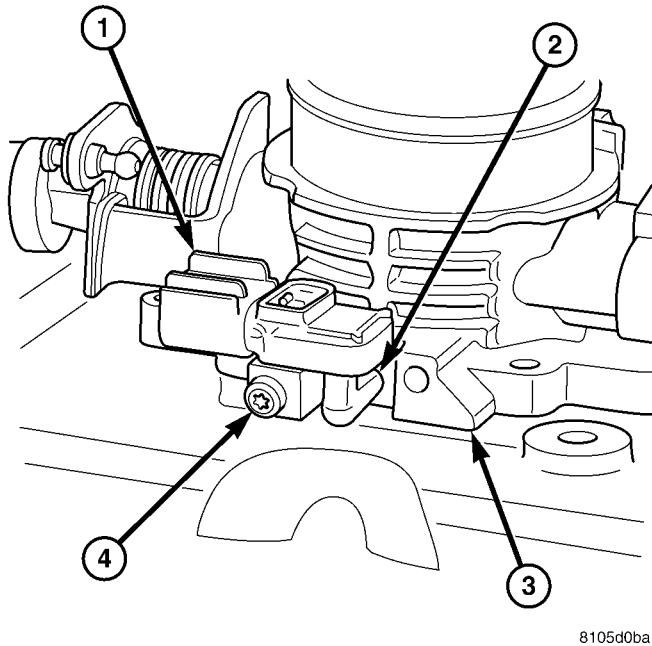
4.0L MAP SENSOR MOUNTING - LATE
